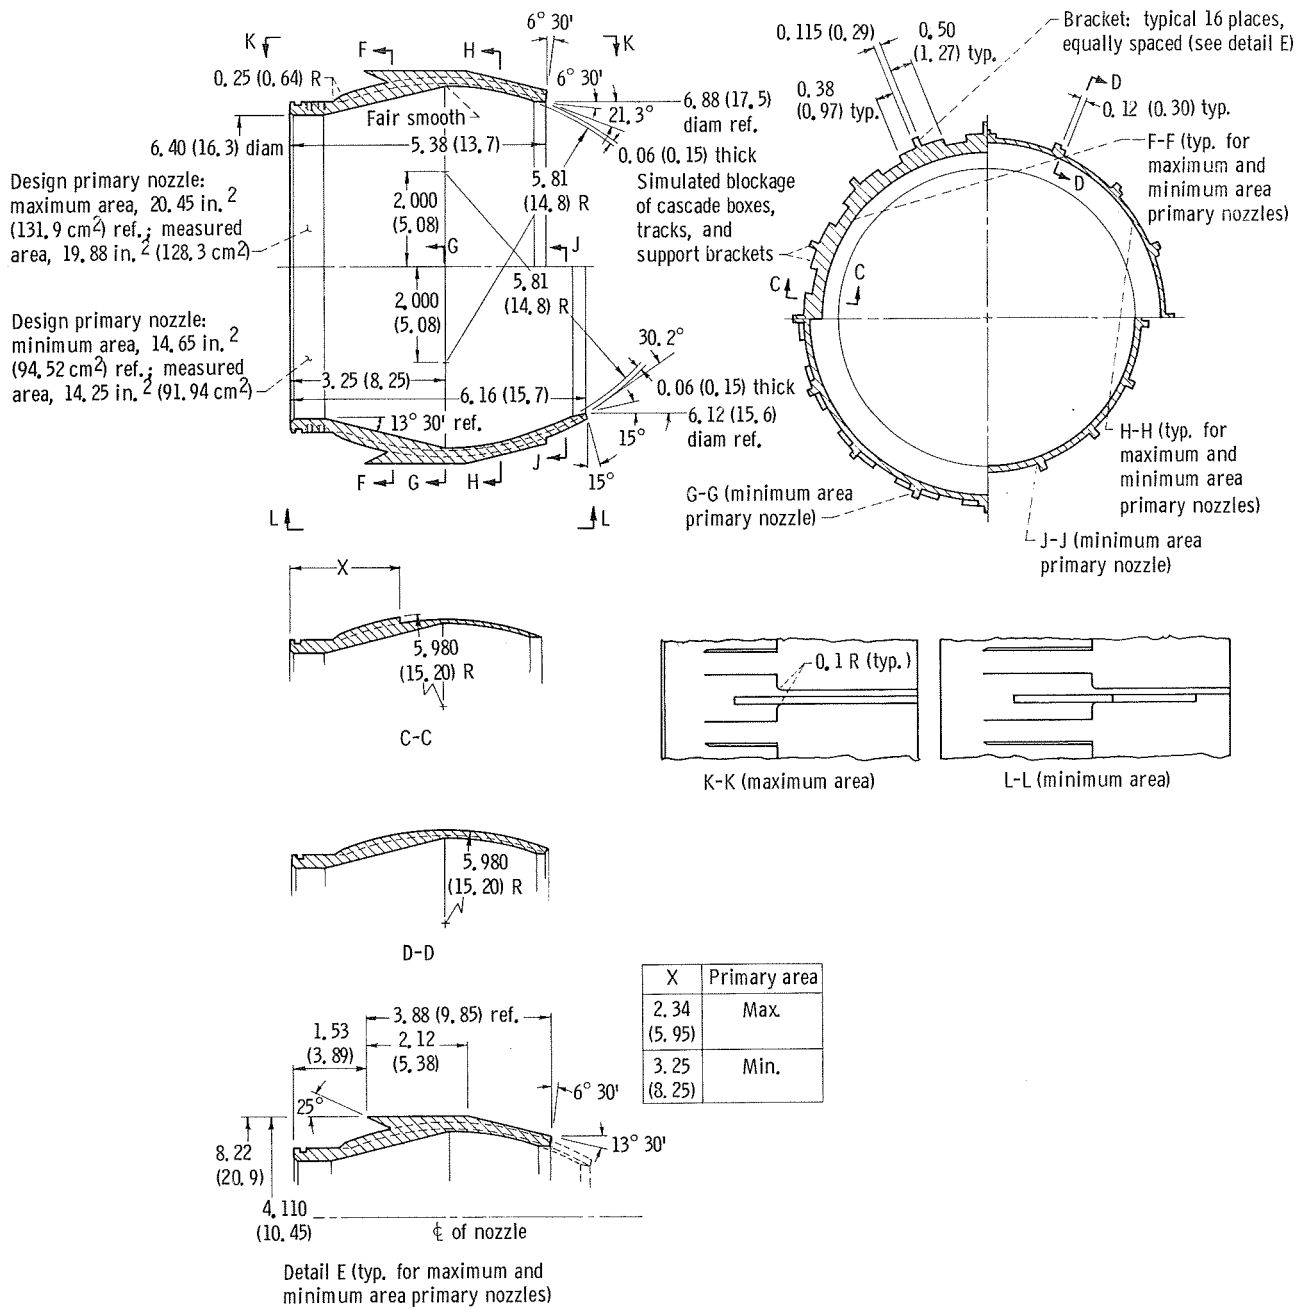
Primary nozzle details. (All dimensions are in inches (cm).)
